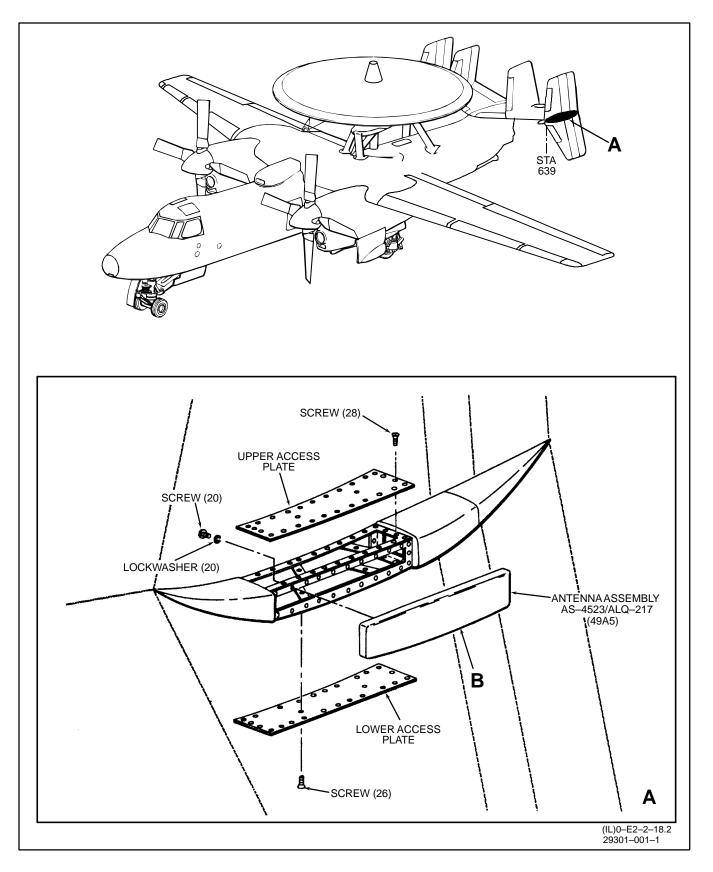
Removal and Installation of Antenna Assembly AS-4523/ALQ-217 (49A5) (Sheet 1 of 2)
